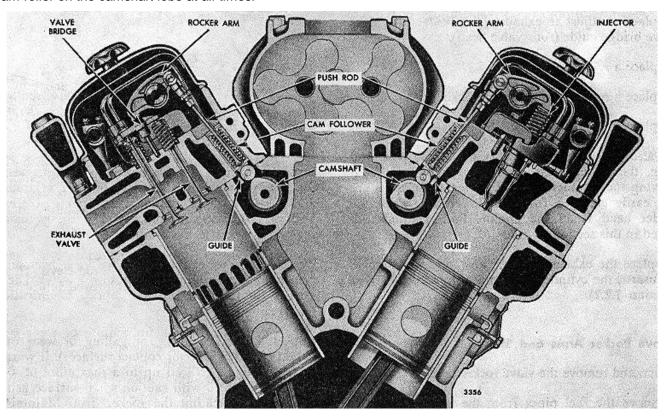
Valve and Injector Operating Mechanism (Four-Valve Head)
